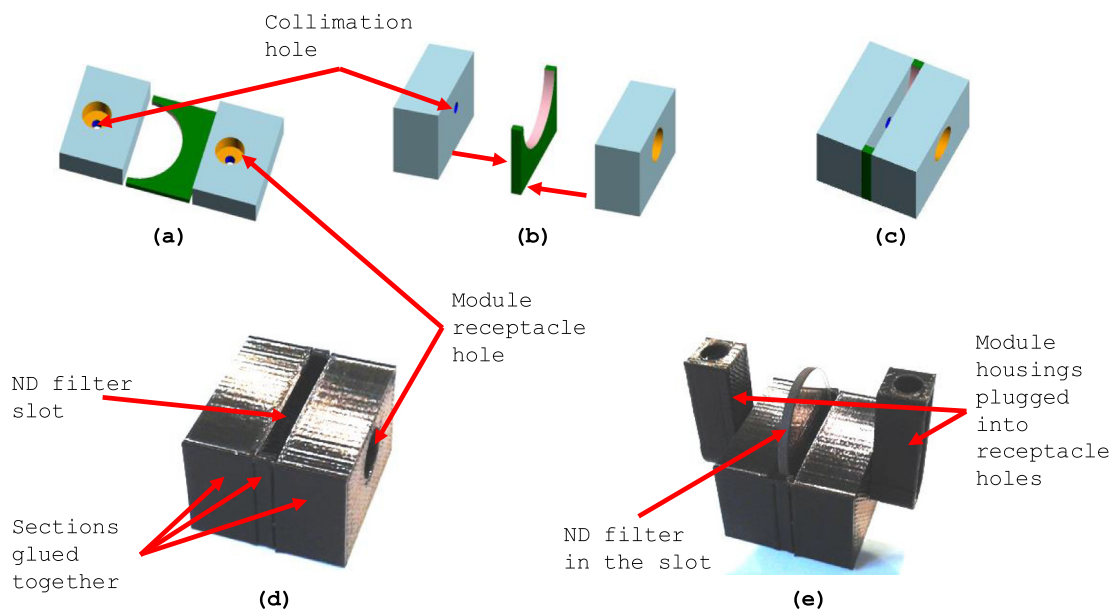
The optical calibrator. a) CAD model optimised for printing of individual sections on a plastic filament extruding 3D printer. b) CAD model showing the assembly of the separate parts for gluing together. c) CAD model of the assembled unit. d) Photograph of the glued-together optical calibrator unit, showing slot for ND filter insertion and the hole for the LED or sensor module. e) The optical calibrator with two modules plugged in (notionally one LED module and one sensor module), and a 25 mm ND filter located in the slot.
